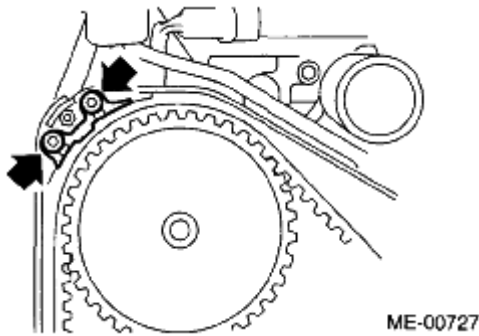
Identifying Timing Belt Guide Mounting Bolts (2 Of 4)
